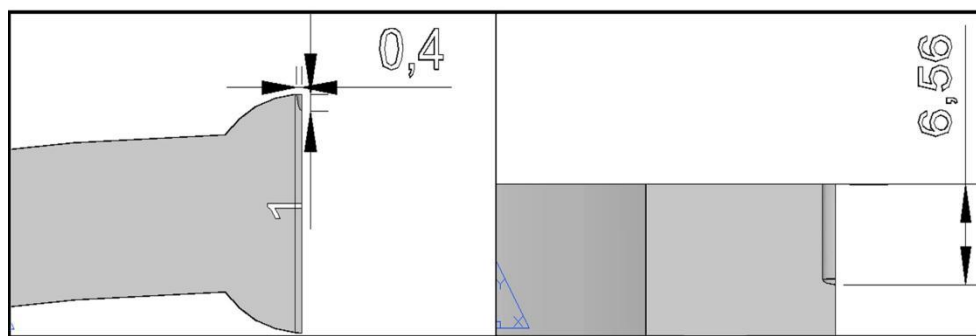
Approach of the longitudinal crack and Depth of the crack (plan view).
